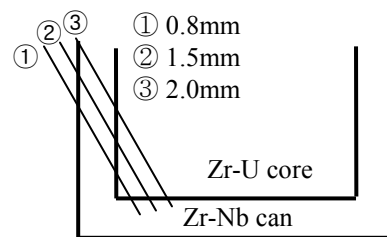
Sketch of the Zr-U core machining the rear part in three ways
